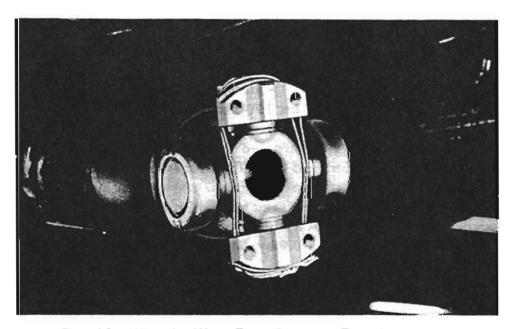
Wire the Wing Type Bearings Together Before Removing the Assembly from the Car.
